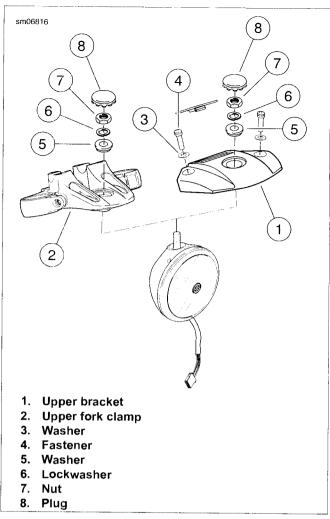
Headlamp Mount: XL 883L/N/R, XL 1200L/N, XR 1200/X
